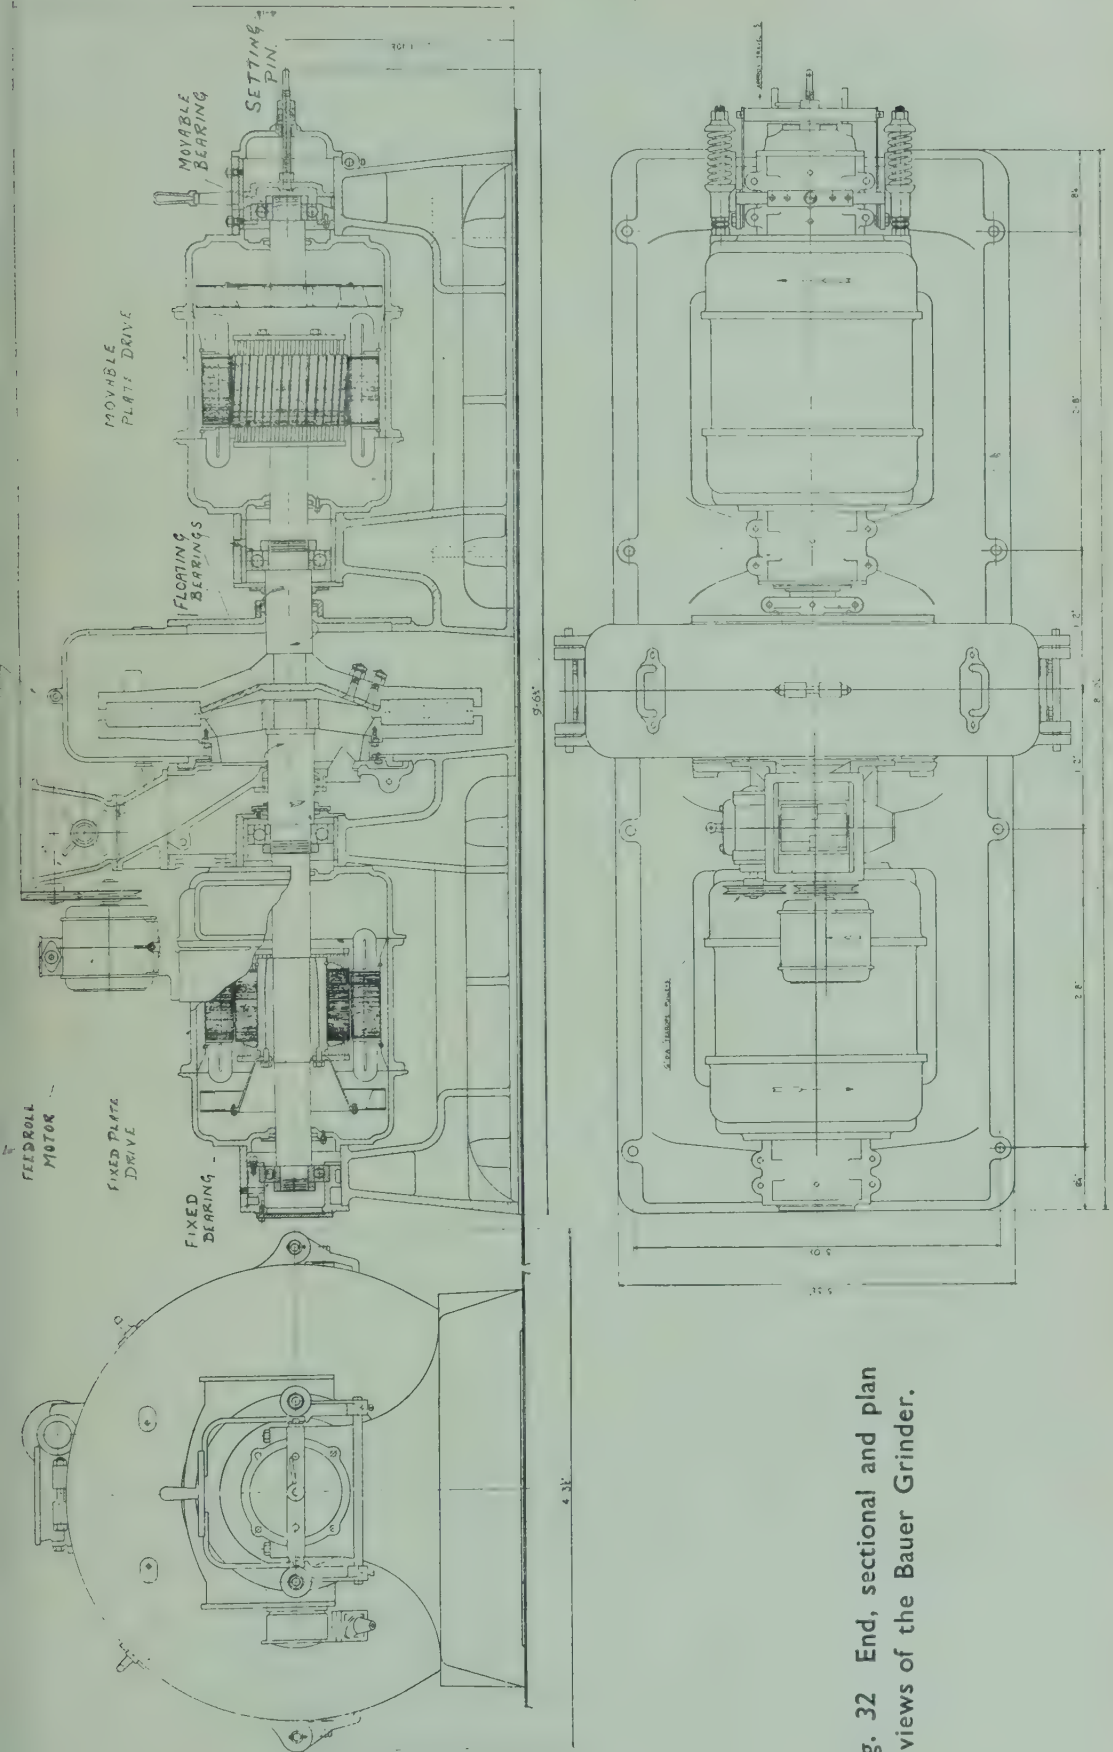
End, sectional and plan views of the Bauer Grinder.
